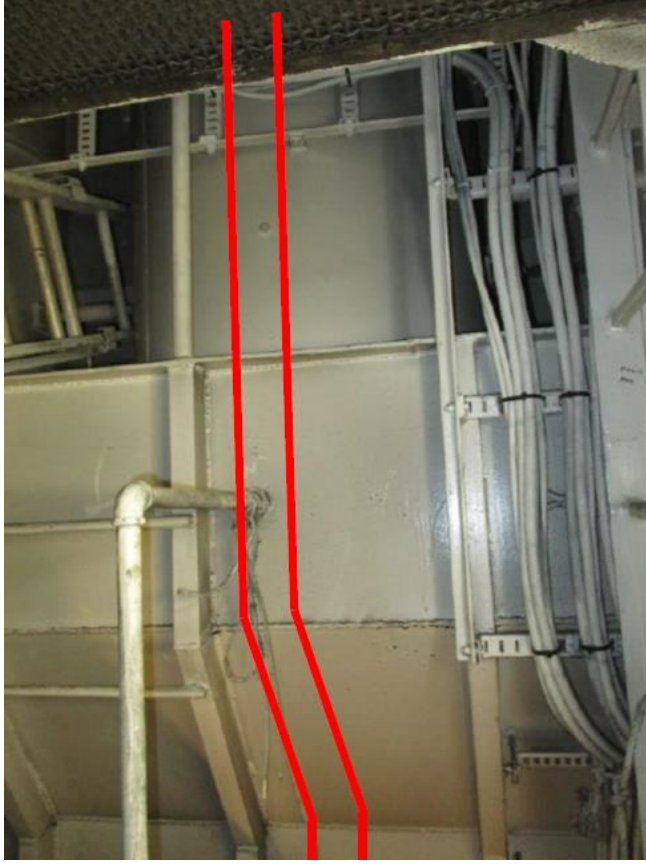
Routing of pipe in engine room, inboard of hoist rail port side looking forward
